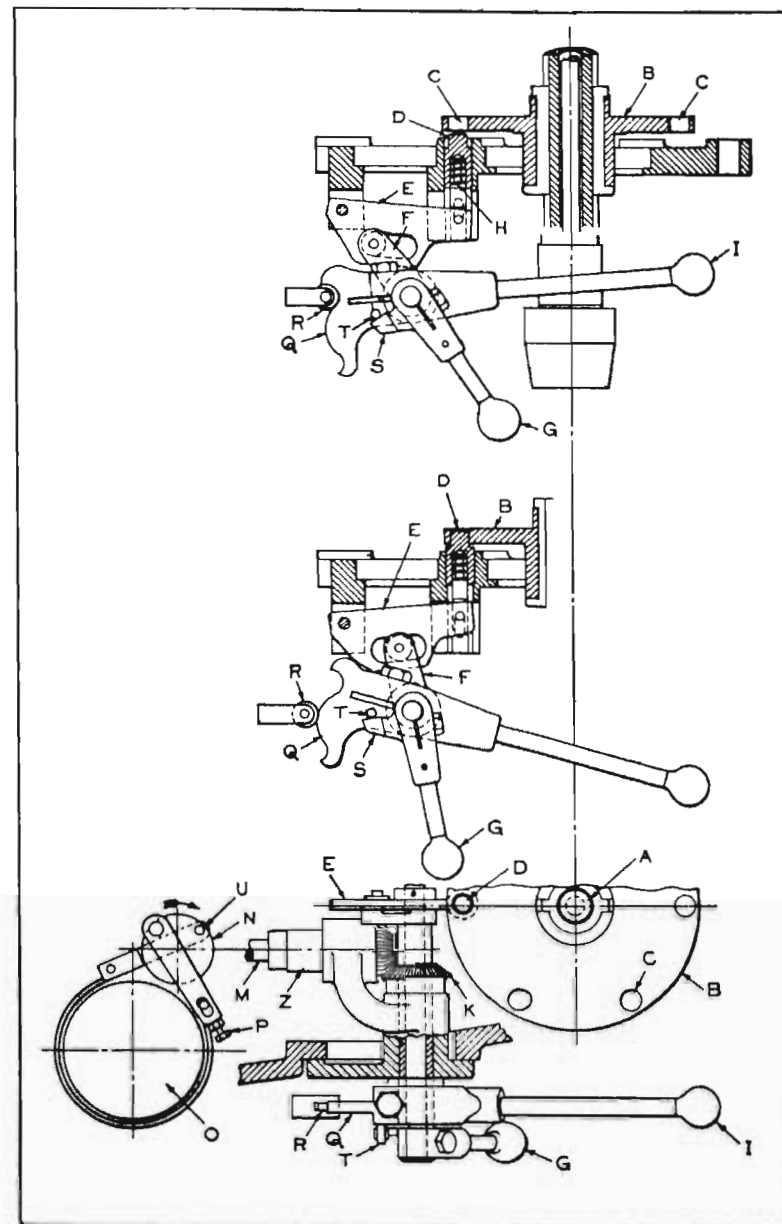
Milling Machine Spindle Brake. (Top) Operating and Braking Levers *G* and *I* Disengaged to Allow Spindle to Rotate; (Center) Levers Positioned to Lock Spindle against Rotation; (Bottom) Top View of Mechanism and Side View of Brake.
